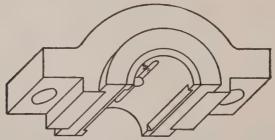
Bearing Cap Showing Oil Groove and Chamfered Edges of BEARING LINER.
